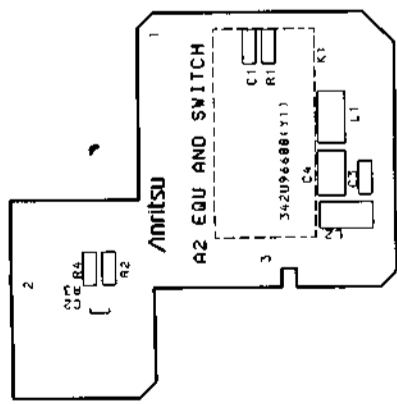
A2-A2 EQU AND SWITCH PC-Board Parts Layout 11
